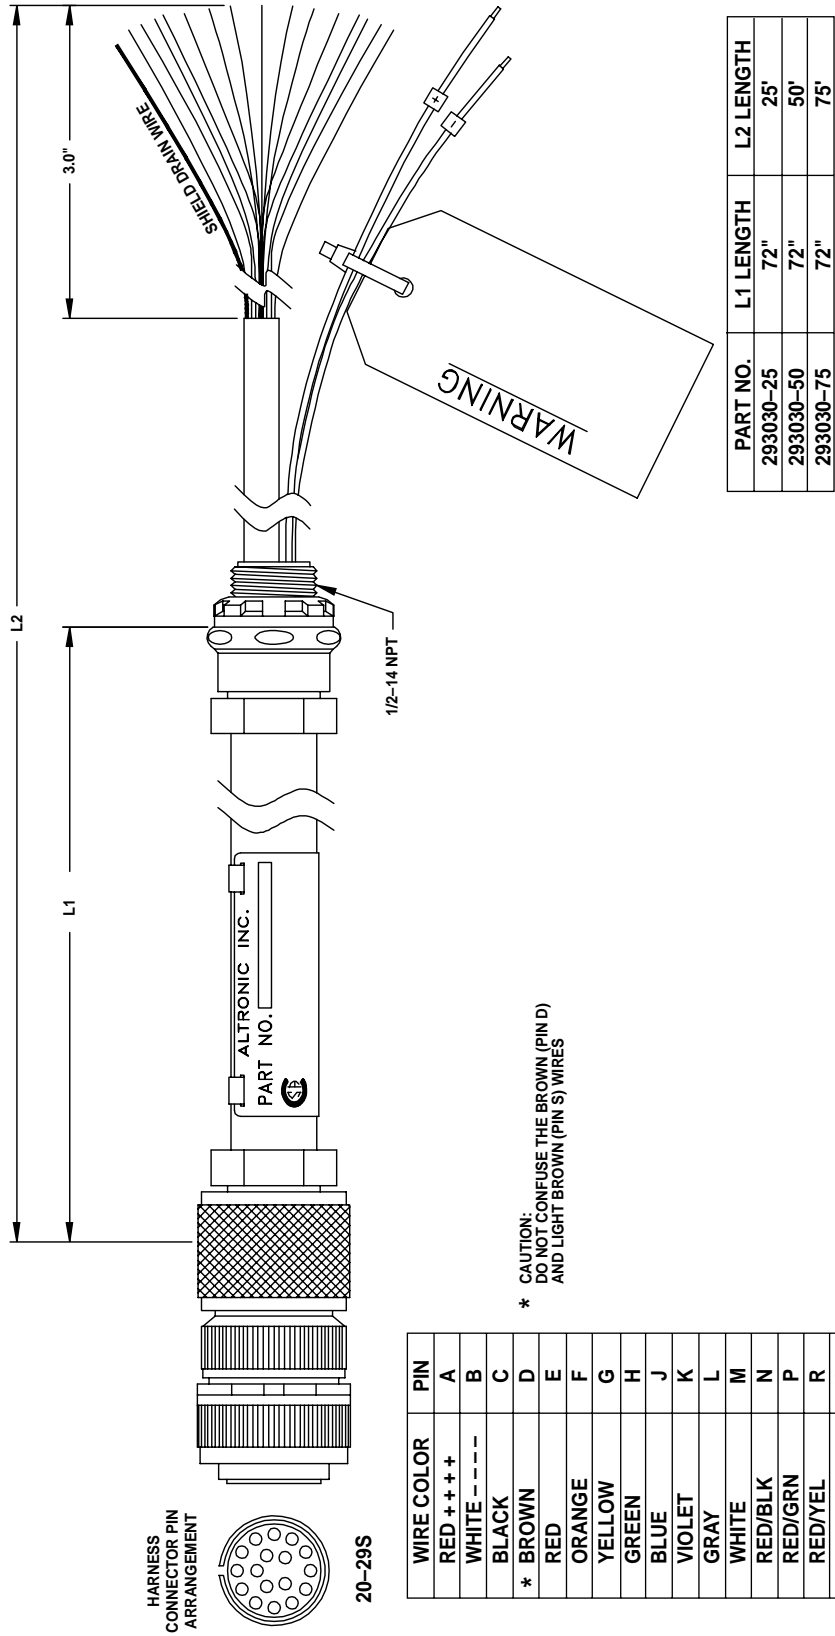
CABLE ASSEMBLY, SHIELDED P/N 293030-XX
